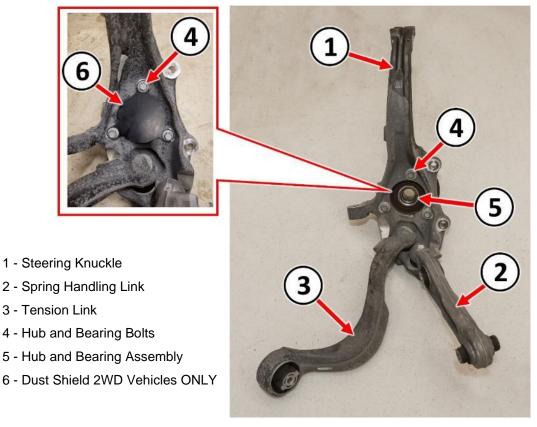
Steering Knuckle, Suspension Links, Hub and Bearing Assembly
